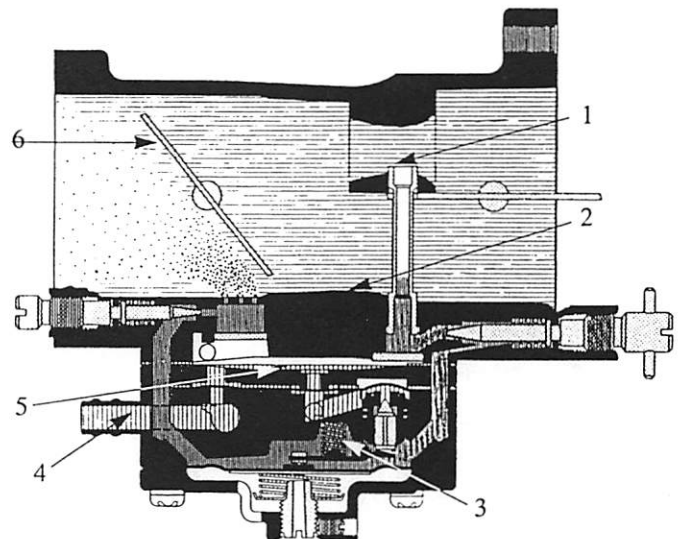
During idling or very slow speed operation, only the primary orifice (passage) is feeding fuel to engine. Air velocity is not high enough to draw fuel out of the high speed circuit. Remember, this circuit controls fuel mixture when an engine is idling.
